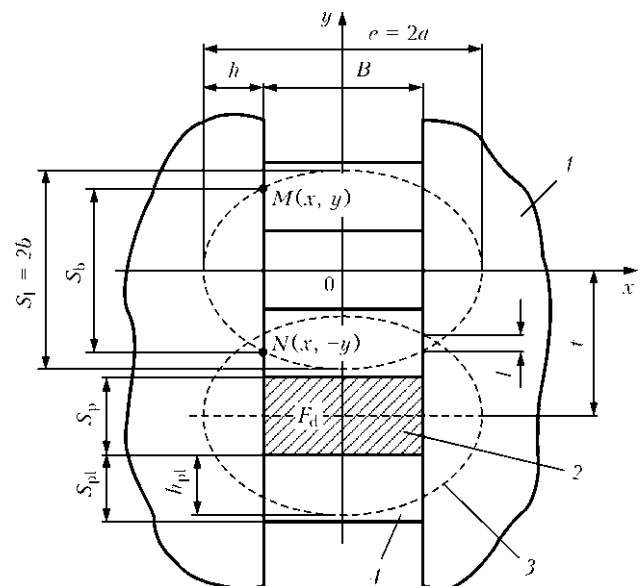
Scheme for calculation of groove and penetration shape in MESW: 1 — body of workpiece subject to repair; 2 — filled-in hole; 3 — penetration shape; 4 — bridge; e — width of a layer of multilayer weld; S_{pl} — thickness of shaping spacer plate; S_1 — thickness of a layer of multilayer weld (see the text for the rest of the designations)
